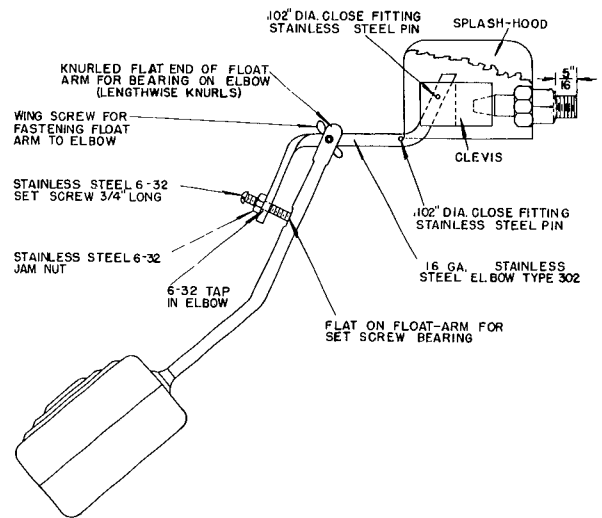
SKETCH OF WATER VALVE AND FLOAT ASSEMBLY
